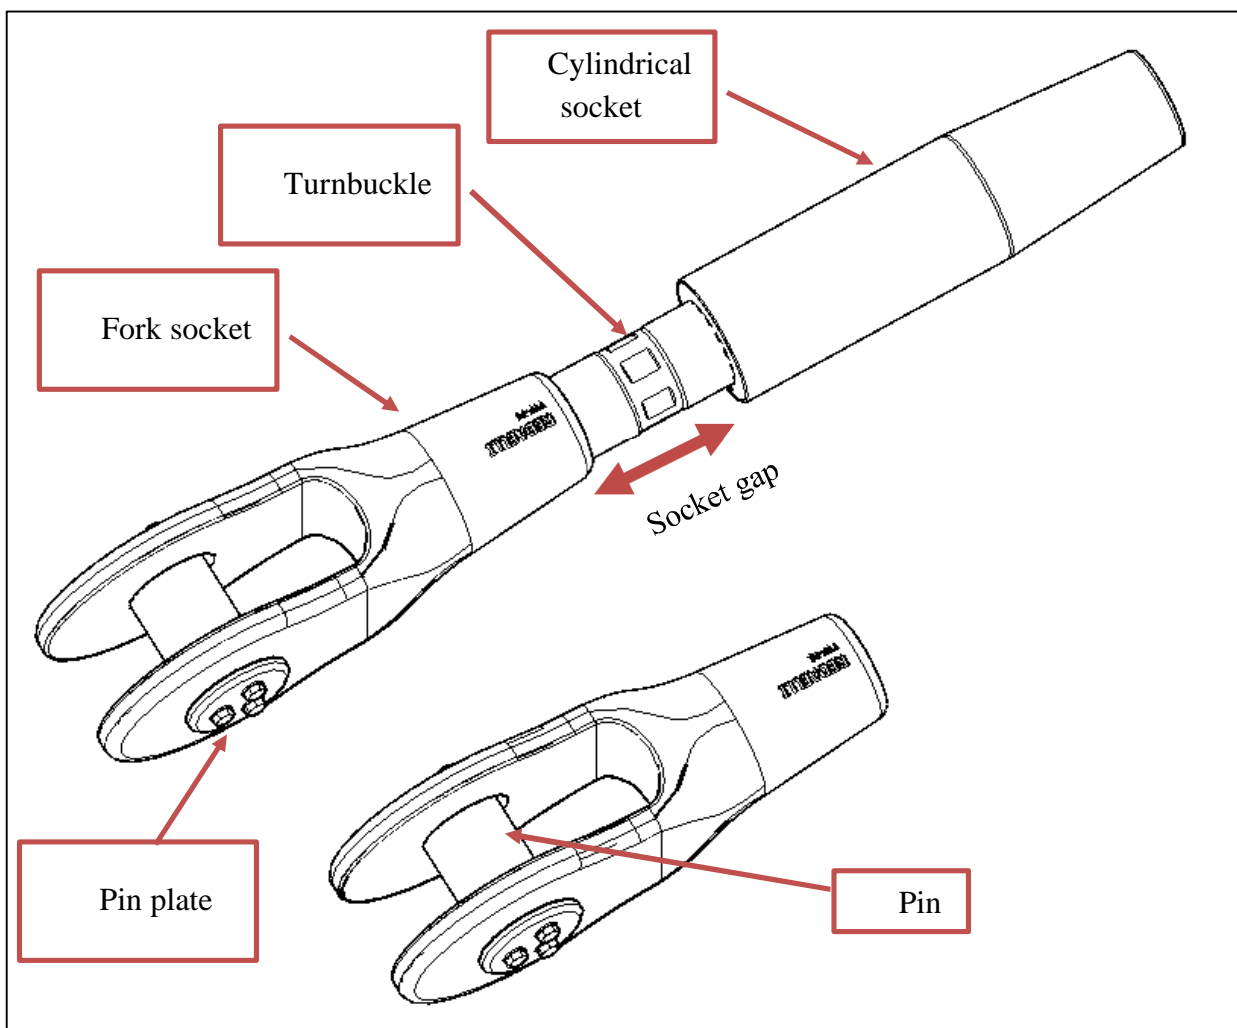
Ashton bridge top and bottom sockets. Drawings supplied by manufacturer Teufelberger Radaelli
